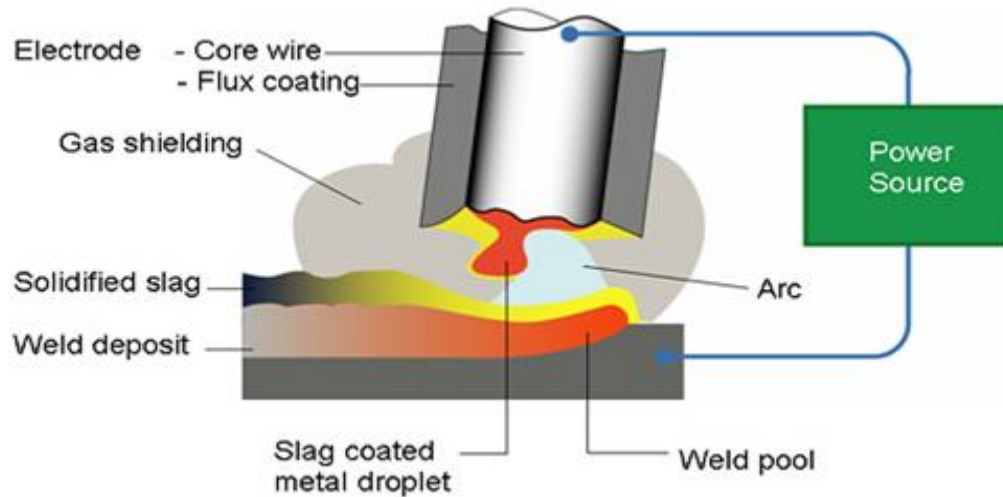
Manual Metal Arc Welding Process ^[2]
